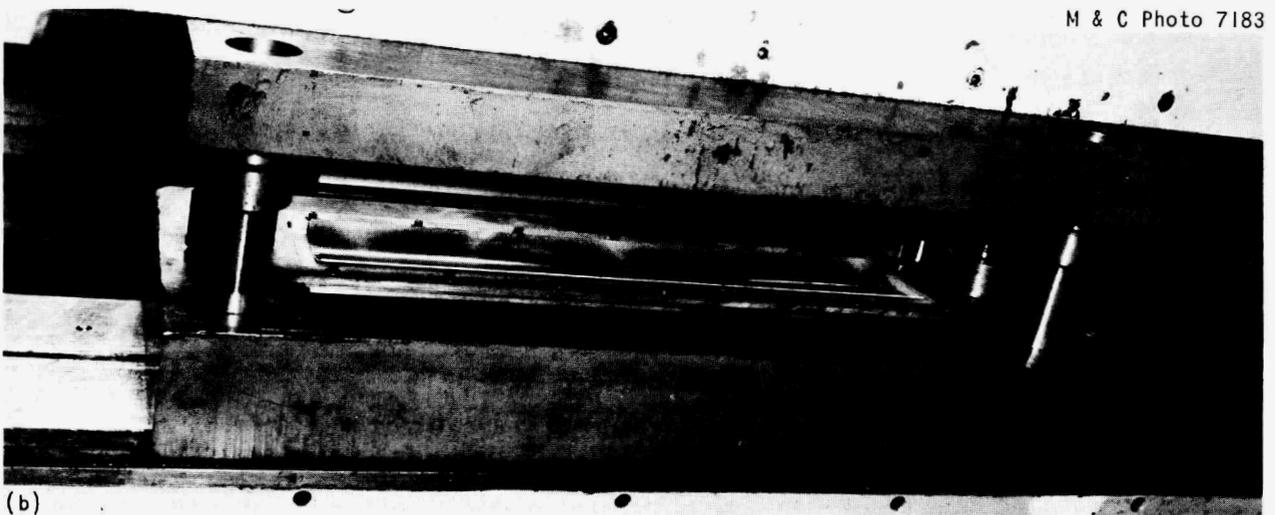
Involute Forming of a Fuel Plate with a 150-Ton Press.
